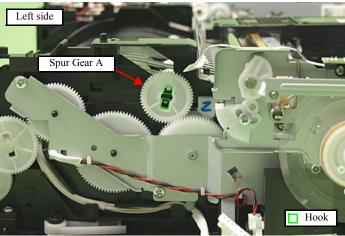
Removing the Lower ASF Paper Guide Assy (1)
